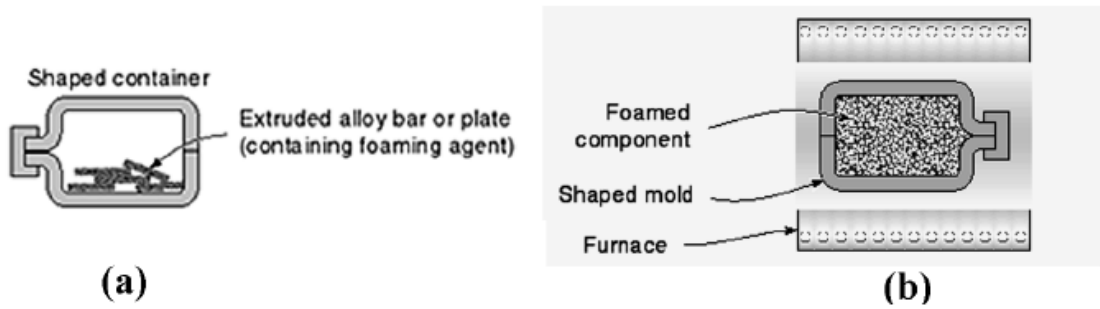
Foaming inside a mould (a) inserting precursor material (b) foaming in the mould.
